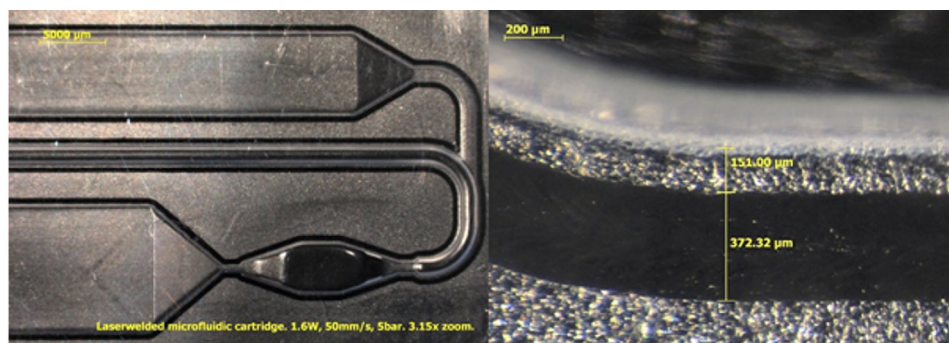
Stereo microscope images from top direction of the welding seam using 3.15 $\times$  and 64 $\times$  zoom.
